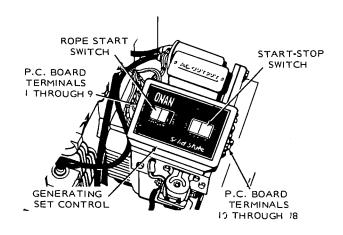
GENERATOR SET CONTROL ASSEMBLY
